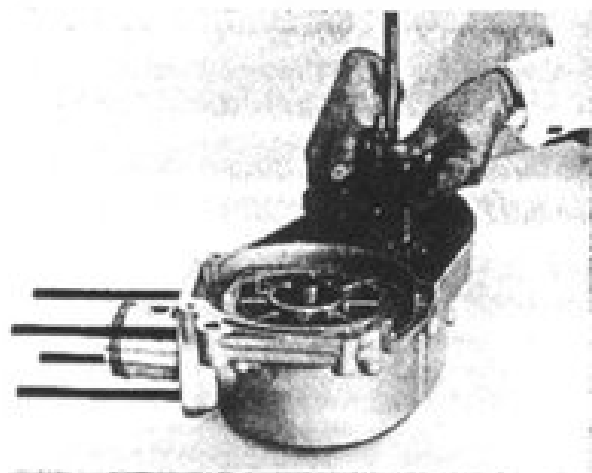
Mounting the shaft with gear shift forks and gears, HJ-10-3 motorcycle.
